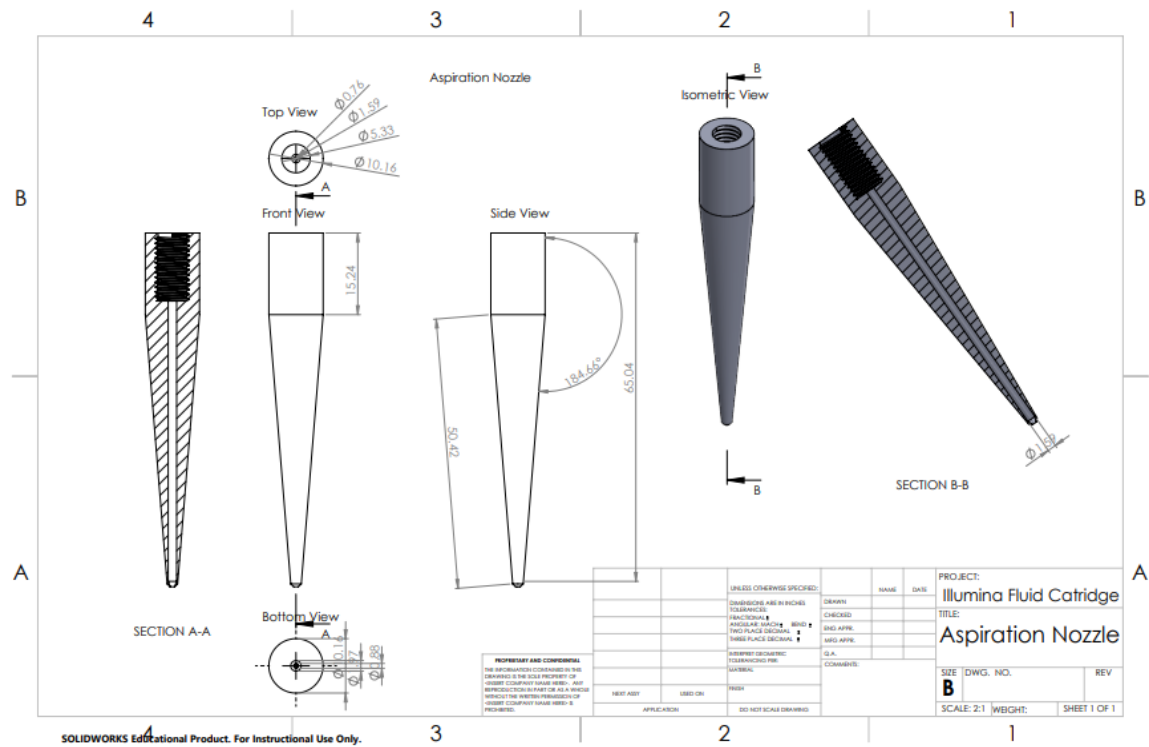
Technical drawing of Aspiration Nozzle with multiviews. Detailed view can be seen in Appendix C.
